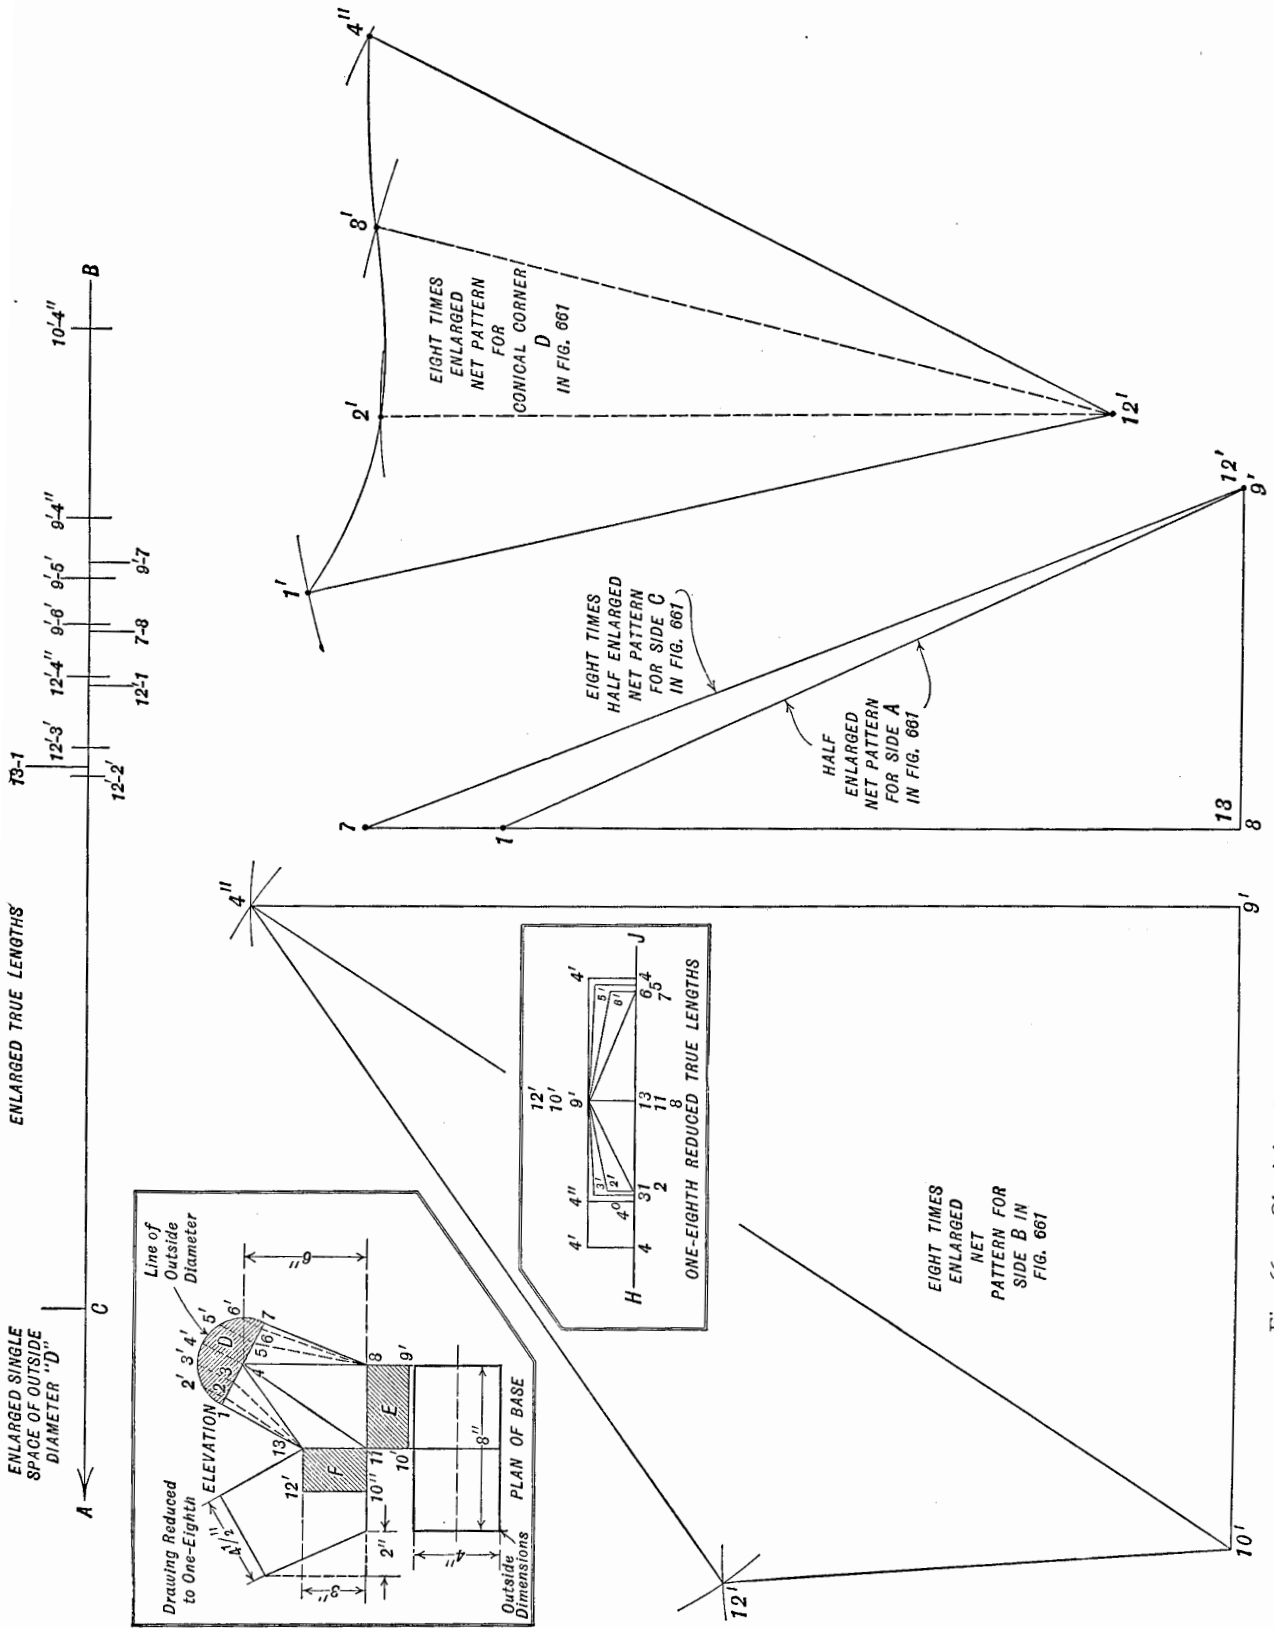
Obtaining Full Size Patterns of Large Y Transformer by Means of Reduced Drawings
